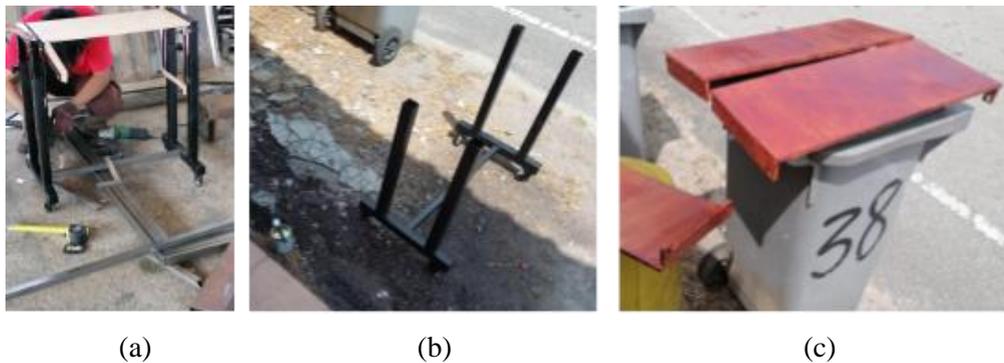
Fabrication process of convertible table and shelf, (a) The hollow section getting welded together, (b) The hollow section painted black, (c) The panel with wood varnish
